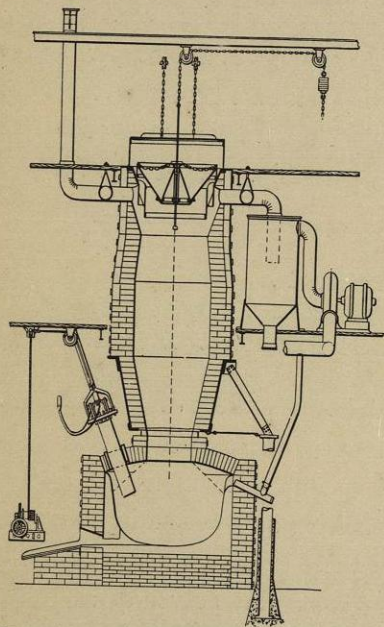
No. 2 Grönwall Furnace (vertical section).
